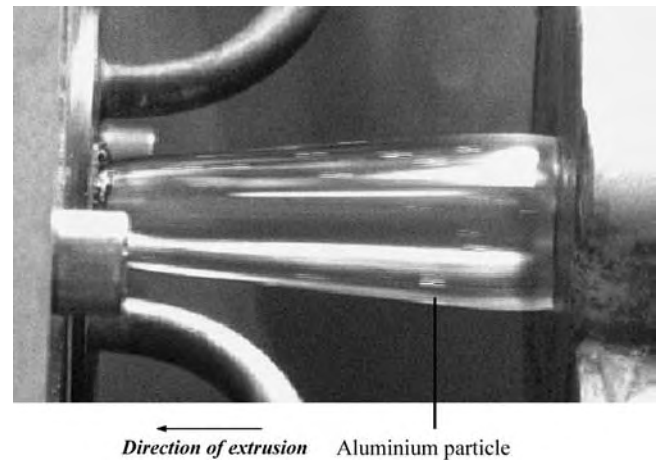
Multilayer technique to measure velocity in tube thickness: aluminium particles in the thickness of the tube throughout polymer air drawing
